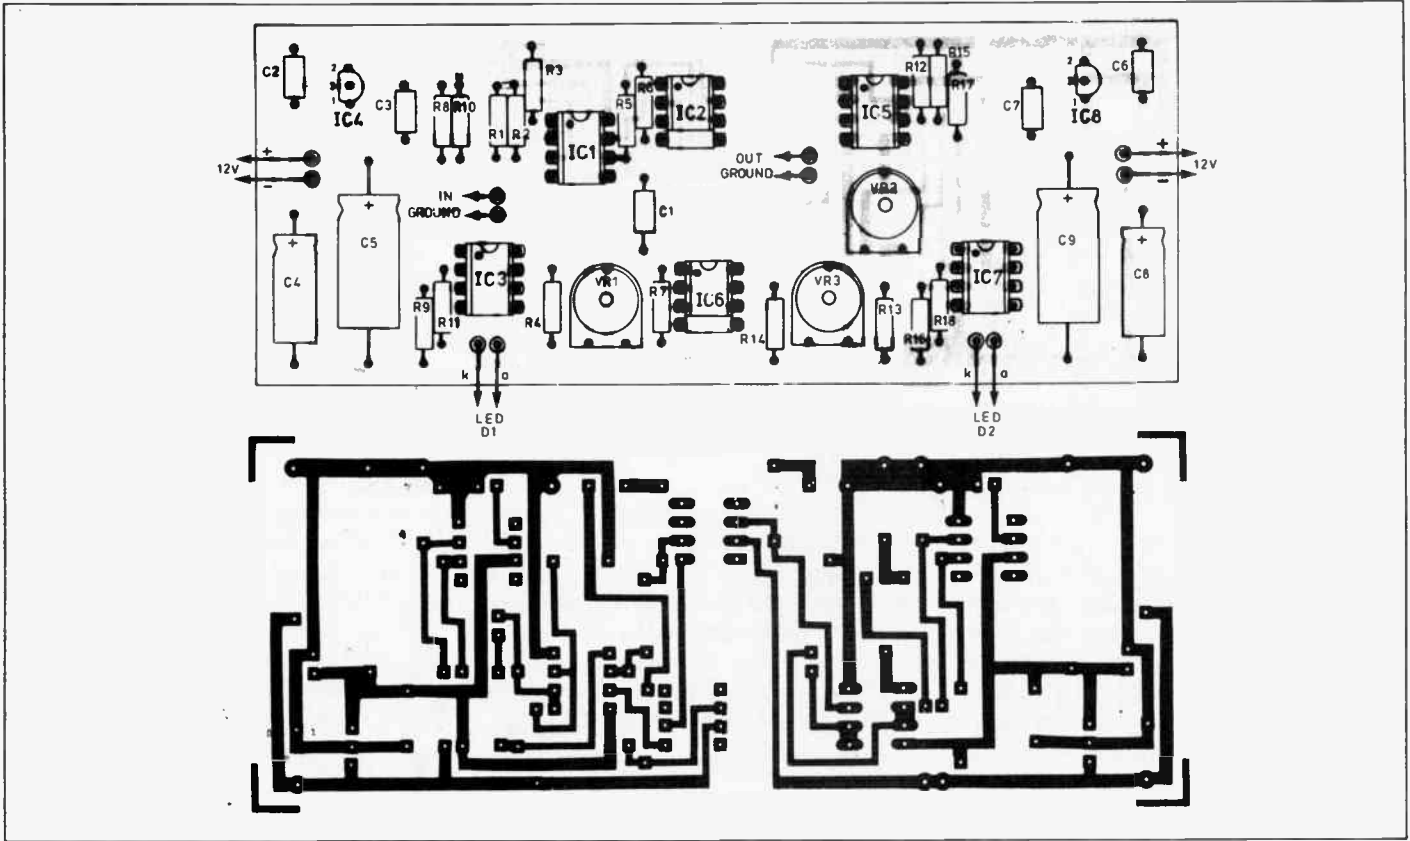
Component layout and full size printed circuit board copper foil master pattern. Note that 8-pin IC holders have been used for the isolator chips IC2 and IC6. The ICs should be plugged into the top section of the holders as indicated.
